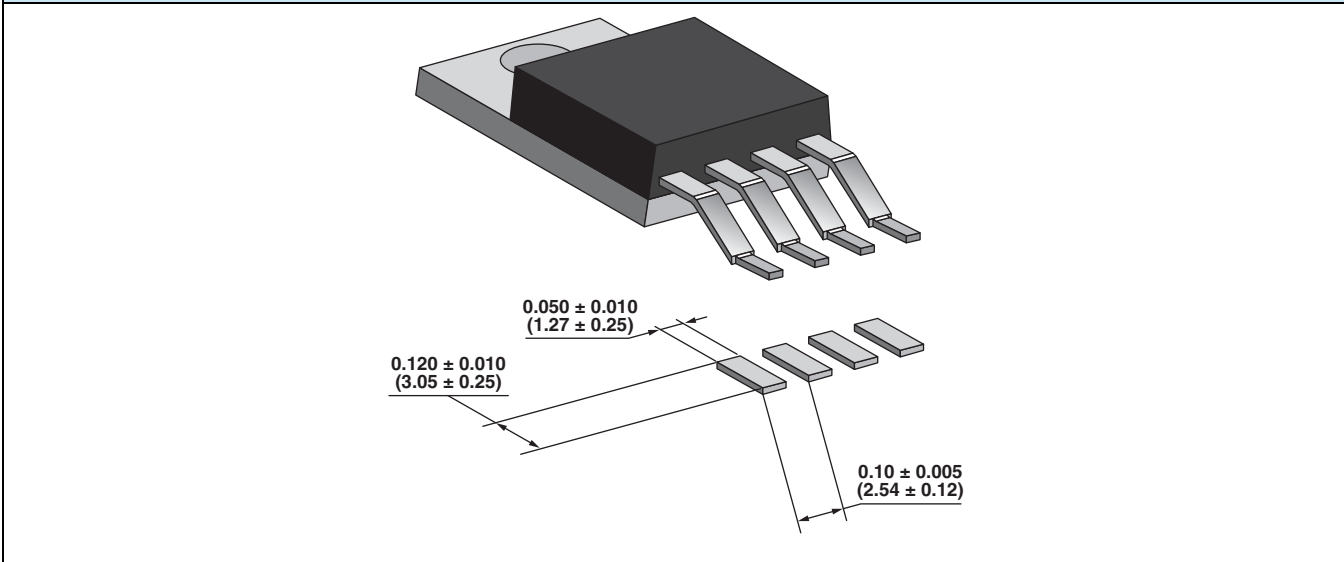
LAND PATTERN DIMENSIONS in inches (millimeters)
